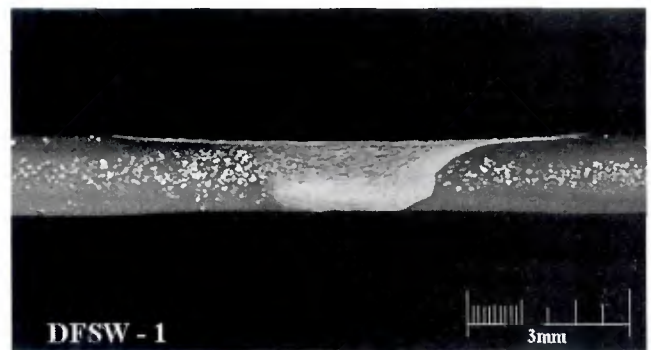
Cross section of a friction stir weld made on 1.5-mm Thixomolded AM60 (right side is advancing side).
